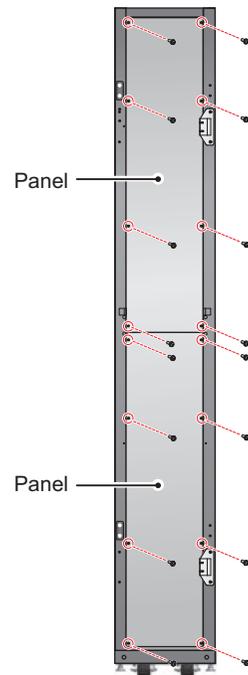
Remove the Cable Entry Cabinet's Rear Door)
